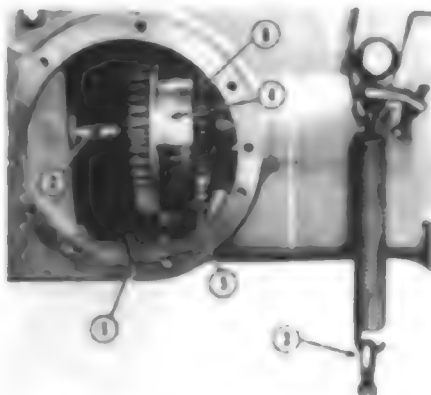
Roll pin to be removed from pto clutch to pull the 1000 rpm output shaft (dual speed) or lower pto drive shaft (single speed).
